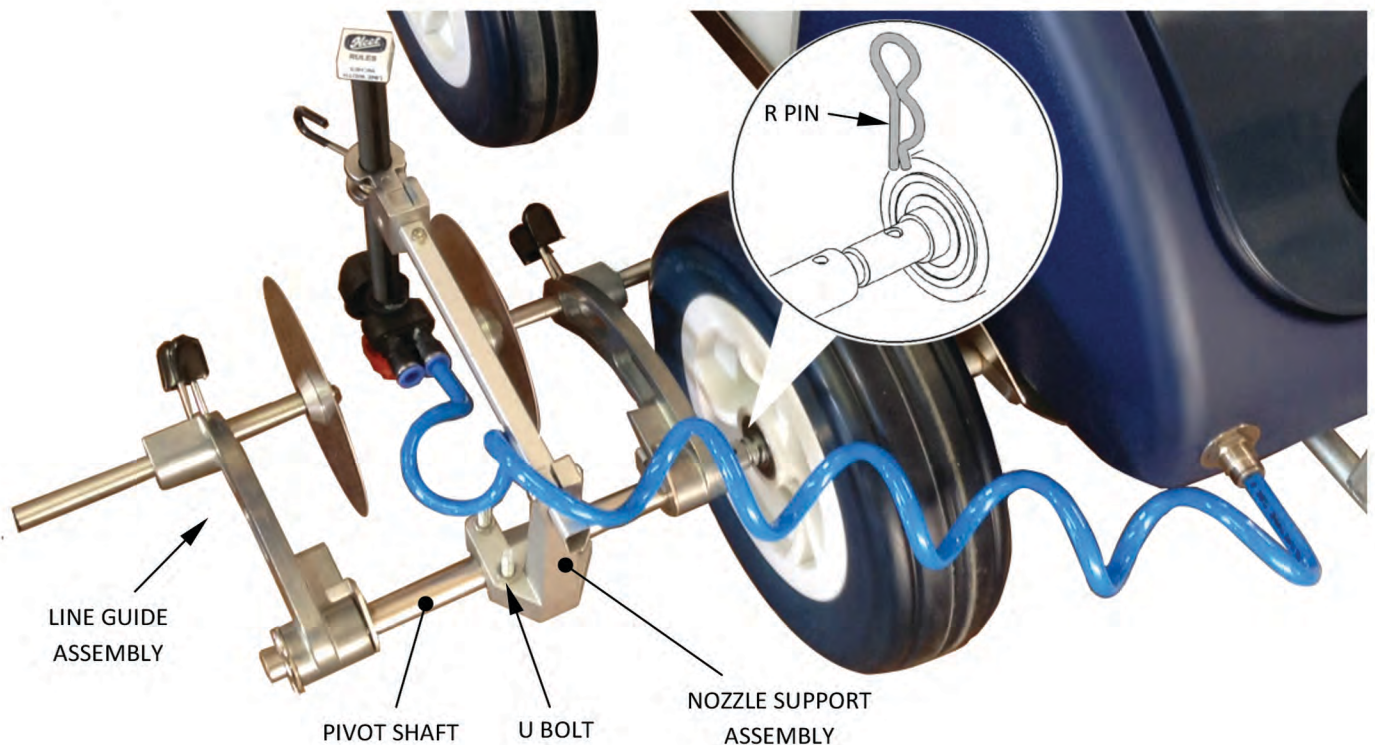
Line guide and nozzle assemblies mounted on the front axle
